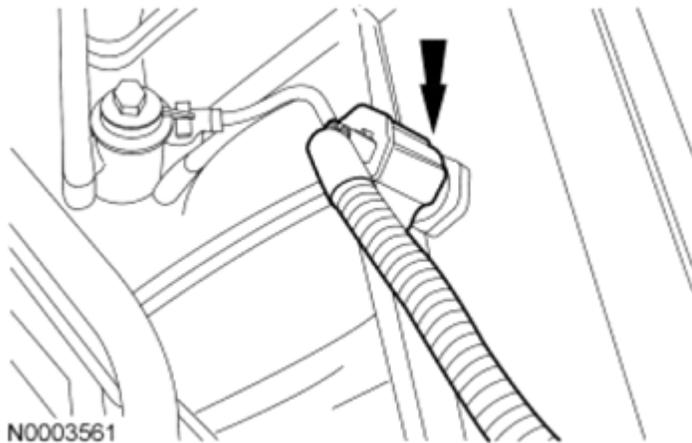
Locating Cylinder Head Temperature (CHT) Sensor Electrical Connector
